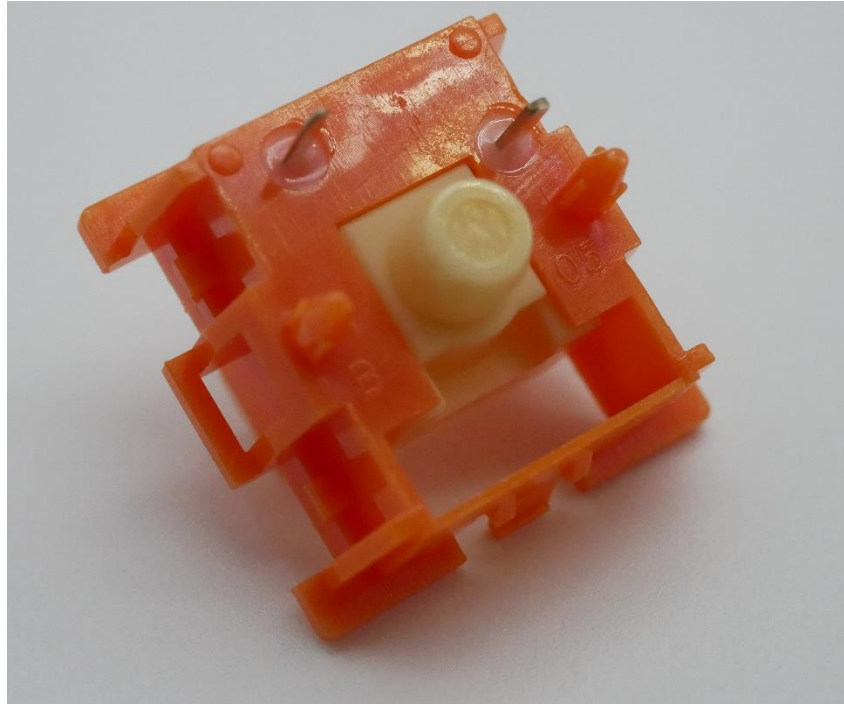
TTC Tiger bottom housing internals showing two-part construction with attachment pins.
